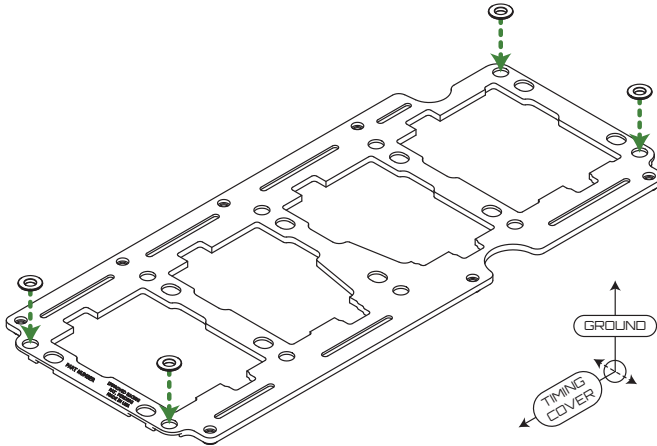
Inserting the Reducer Bushings for Factory Main Studs
